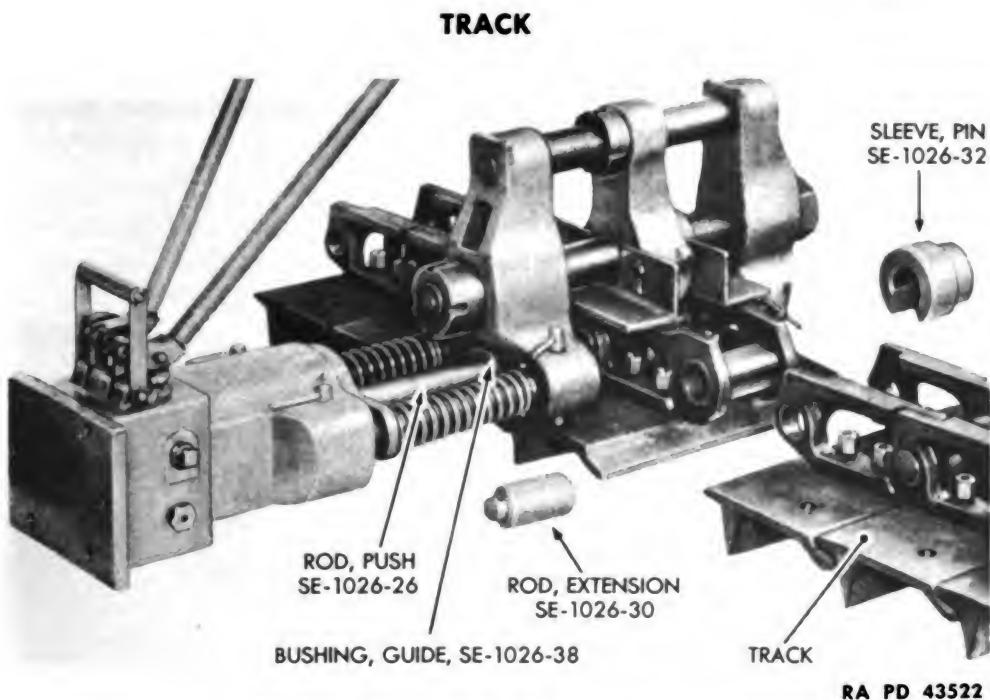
Pushing Pin All the Way Out (Shoes Assembled)
